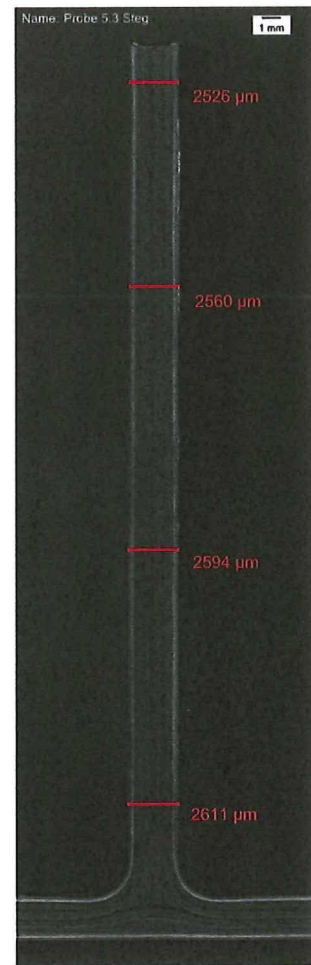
Cross section of panel 14 stringer 3 skin
